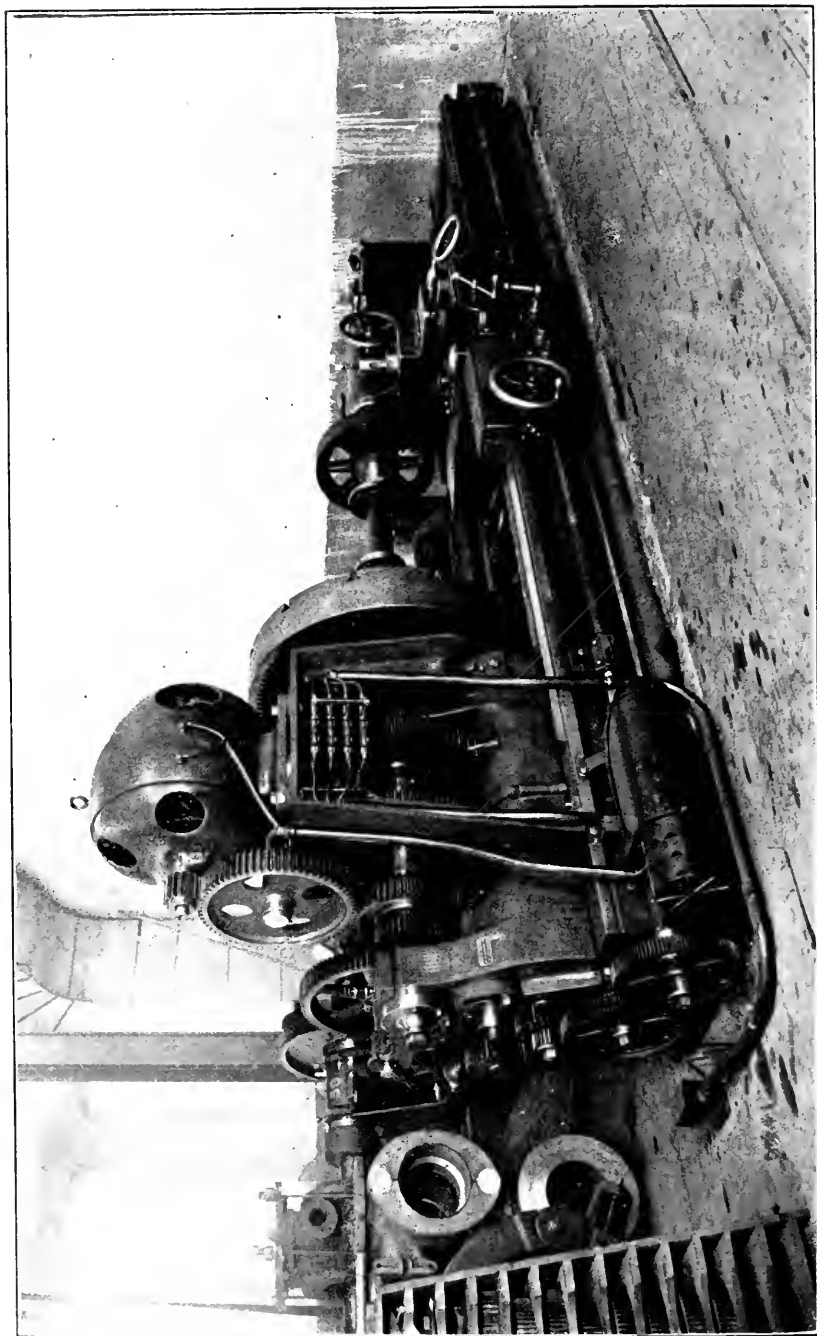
50-inch Pittsburgh lathe, arranged for motor driving by Dodge & Day (Crocker-Wheeler multi-voltage apparatus).
